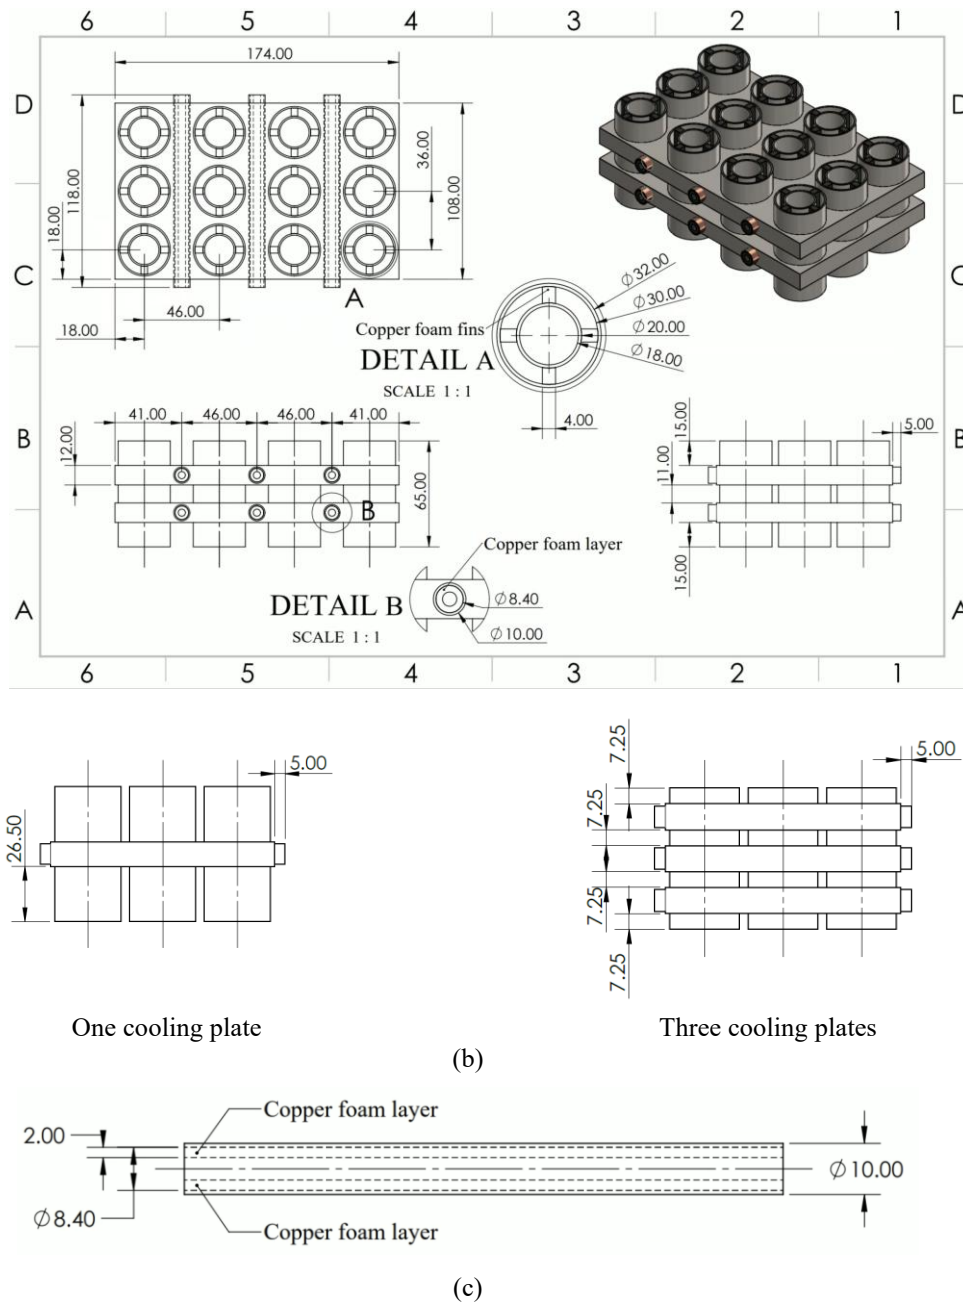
Proposed HBTMS (a) system components, (b) dimensional specifications for different number of cooling plates, and (c) dimensional specifications for copper tube with copper foam layer (DETAIL B) shown in mm.
